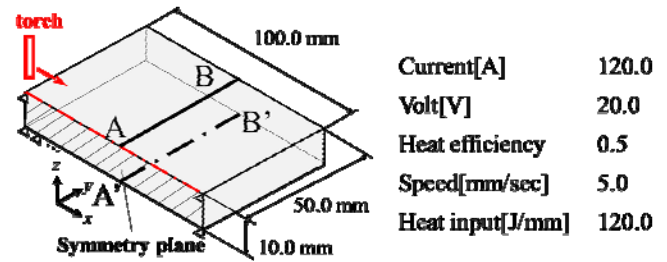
Bead-on-plate welding and welding condition
